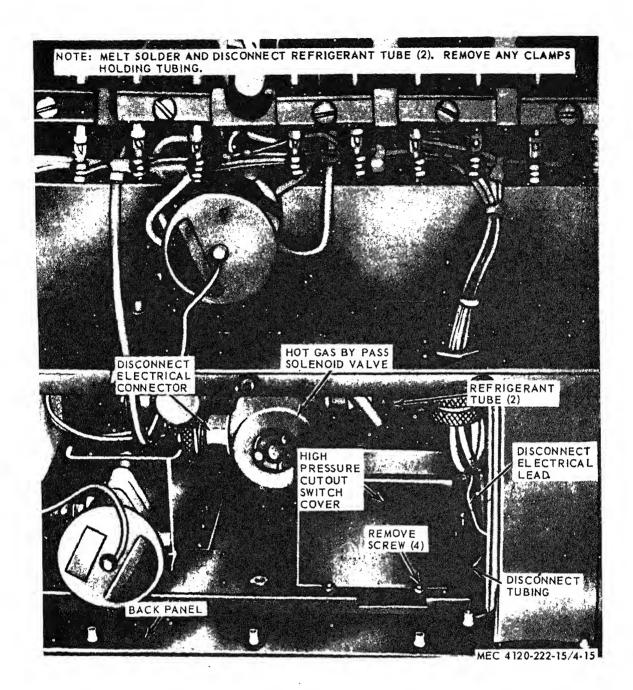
Hot gas bypass solenoid valve, and high pressure cutout switch, removal and installation.
